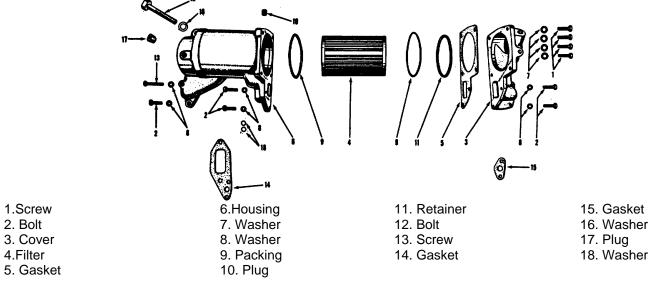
Crane engine oil cooler, disassembly and reassembly.
